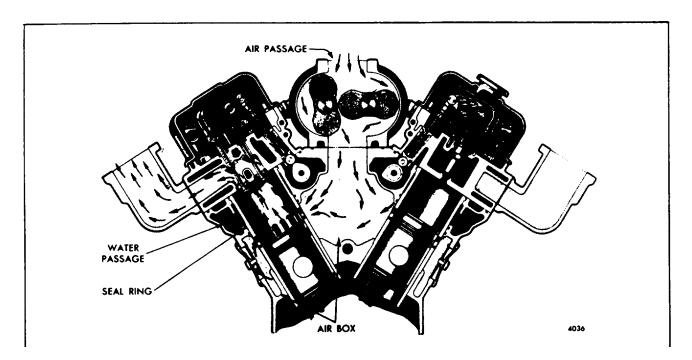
Air and Water Passages in 6V Cast Iron Cylinder Block
